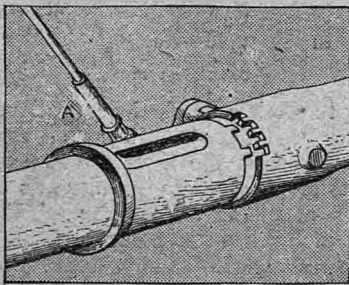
The cold air inlet on the hot air pipe and the air throttle for engine starting. The rod A is operated from the dashboard and is coupled to a butterfly valve in the hot air pipe. By means of this the air to the carburetter can be shut off for engine starting if necessary.
